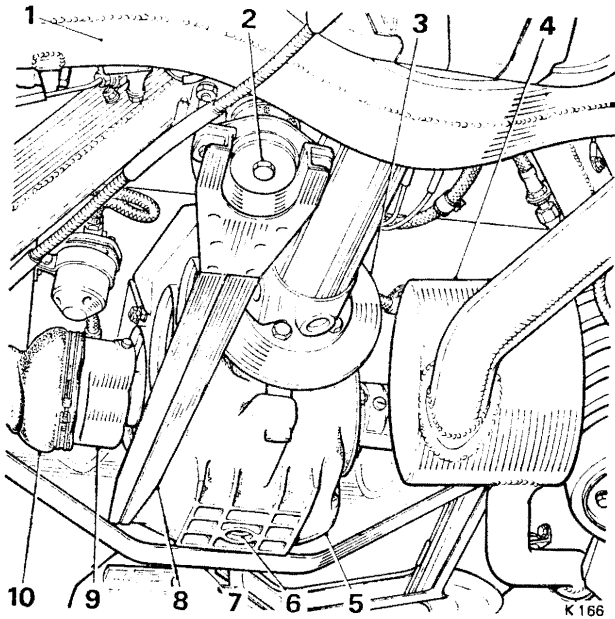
FINAL DRIVE UNIT—IN POSITION
